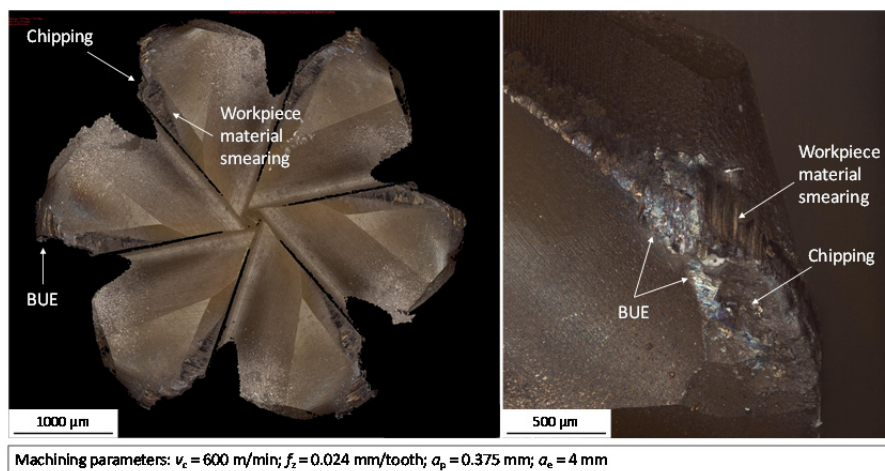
Wear morphology for ceramic end milling tool (when dry machining Inconel 718) [13]
